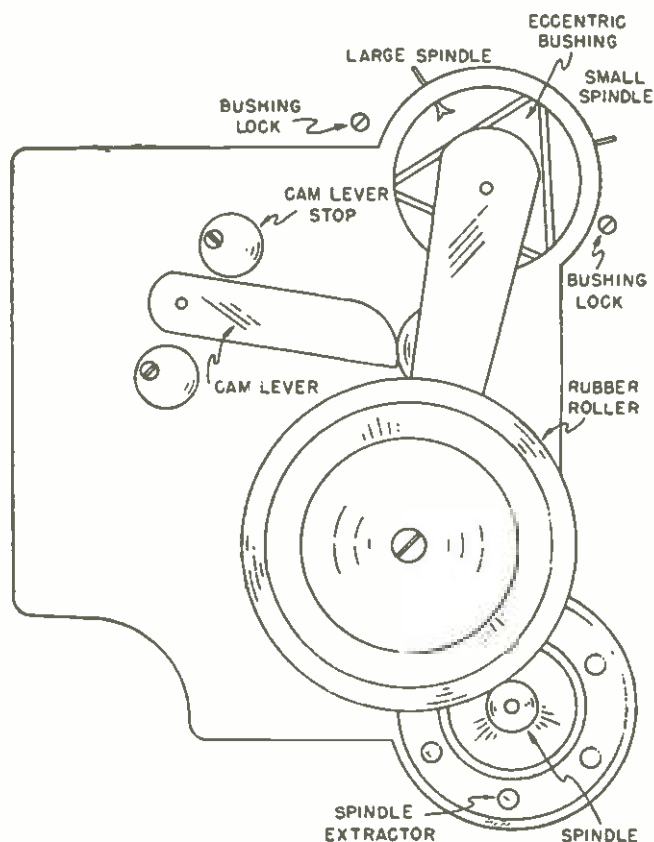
Spindle and roller assembly and detail of the capstan drive of the Rangertone magnetic tape recorder, and the tool used for the removal of the spindle.
